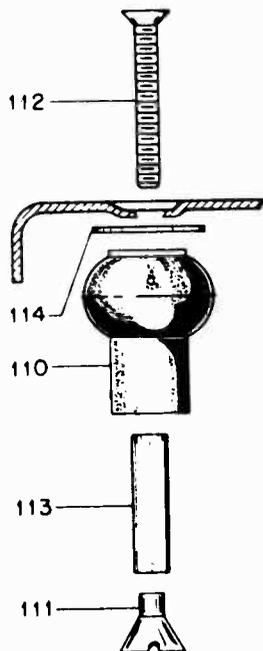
RC-34 SHOCK MOUNT ASSEMBLY
